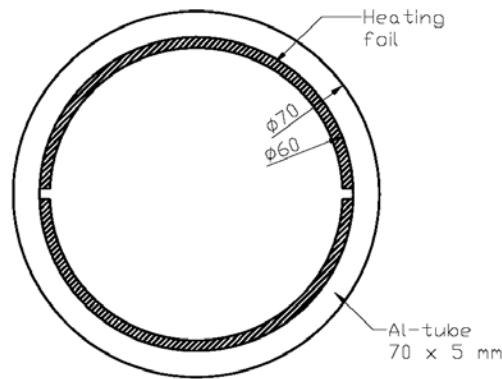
Cross section of the probe showing the aluminium tube, heating and thermistor foil.
